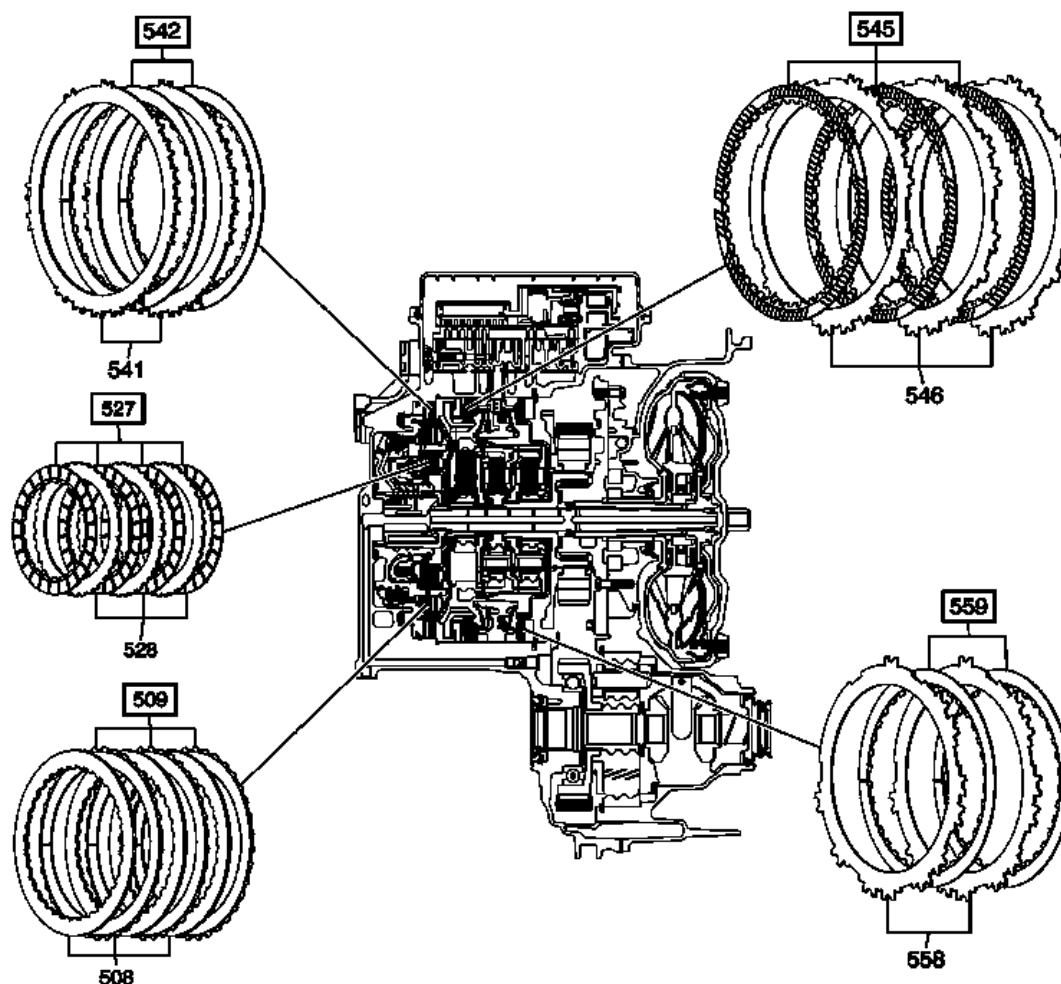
Clutch Plate Package (Gen 1) 24249460
